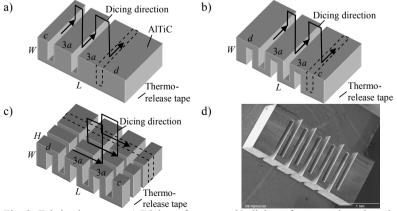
Fabrication steps: a) Dicing of grooves, b) dicing of grooves into the other side, c) slicing the single parts, and d) SEM micrograph of the micro joint
